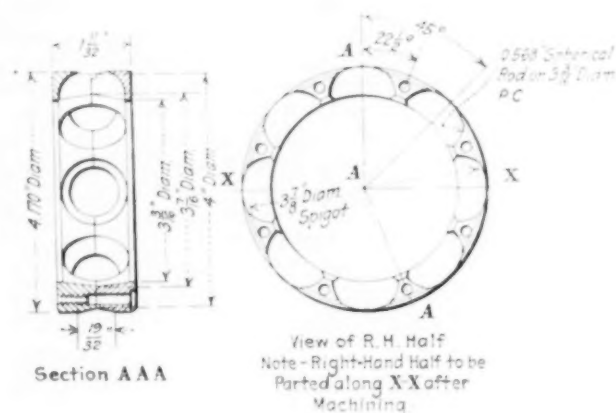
LOCATED CAGE FOR BALL BEARINGS
